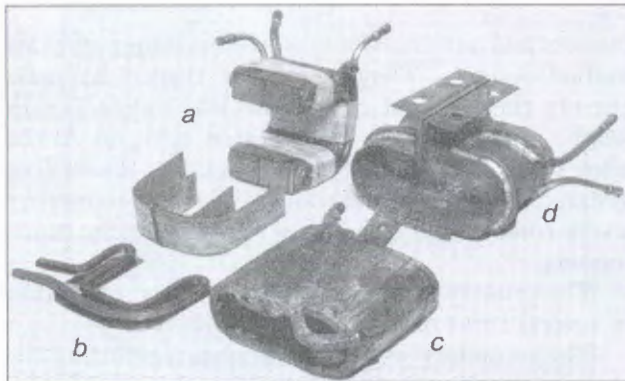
Main assemblies of the P-139 type transformer: *a* — U-shaped coiled sectioned magnetic circuit; *b* — radiator copper sheets with water cooling tubes welded to them; *c*, *d* — primary and secondary windings, respectively
